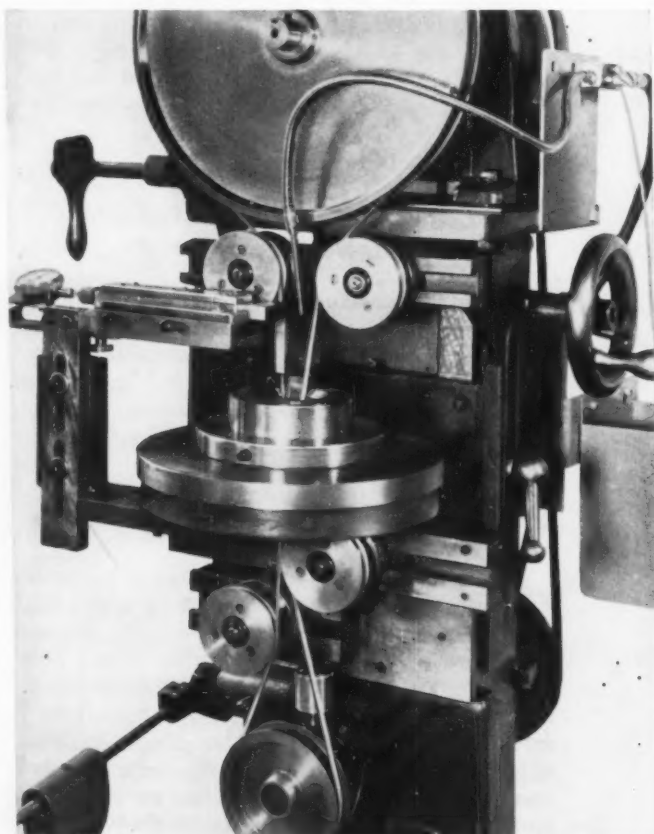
Internal radii of a drawing die are being finished by an abrasive-coated belt on this automatic die-polishing machine. A pair of idler pulleys below the work-table can be adjusted to avoid bellmouthing of the polished die surface.
